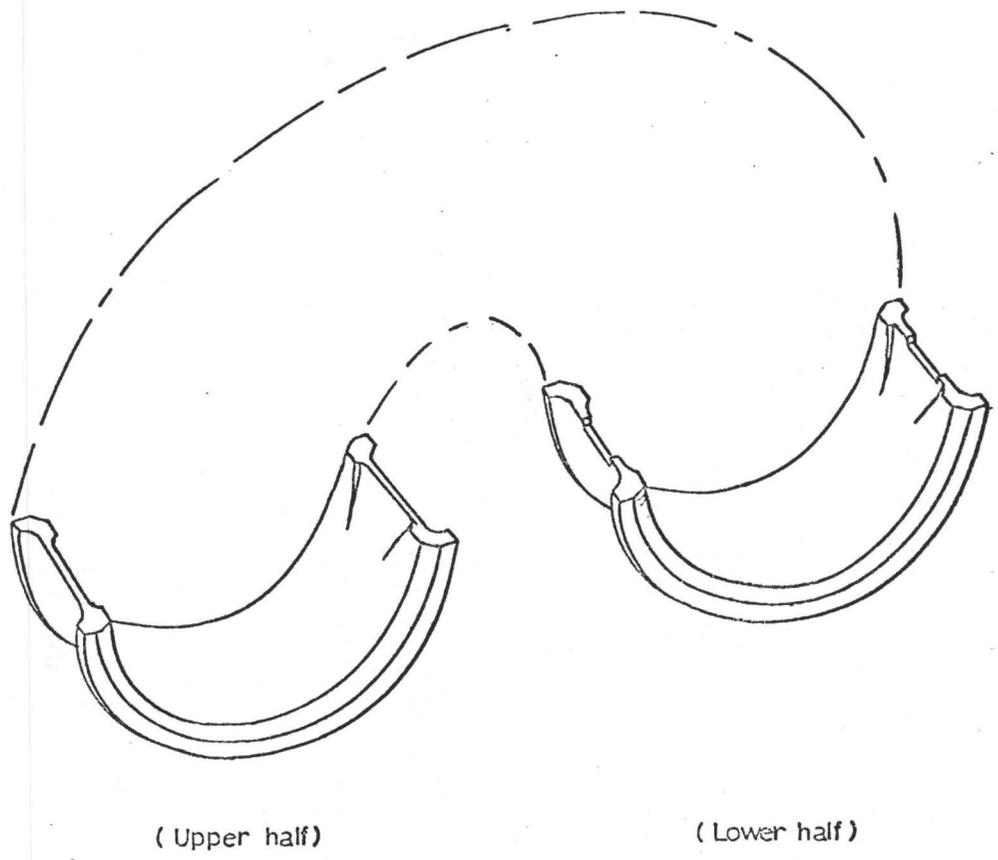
8 Lower and upper half of split bearing with axial oil grooves
